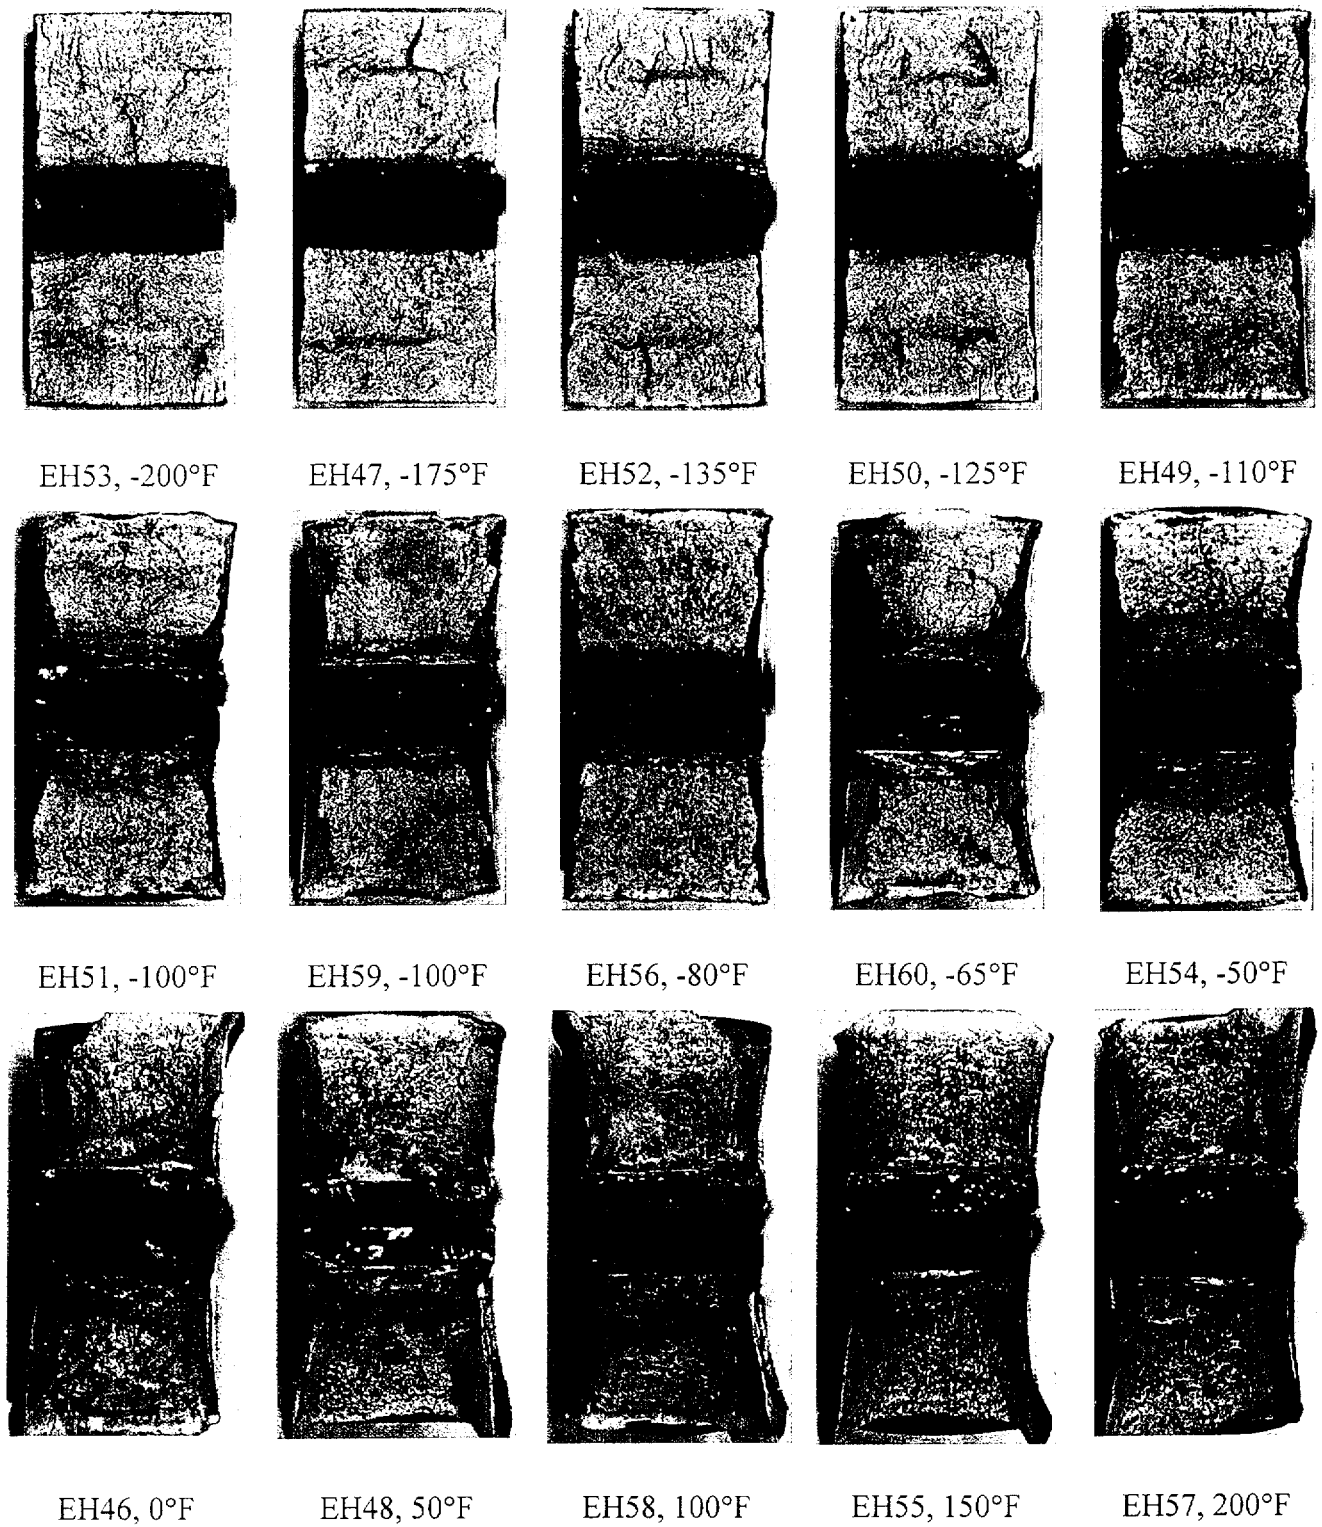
Charpy Impact Specimen Fracture Surfaces for Millstone Unit 3 Reactor Vessel Heat-Affected-Zone Metal
